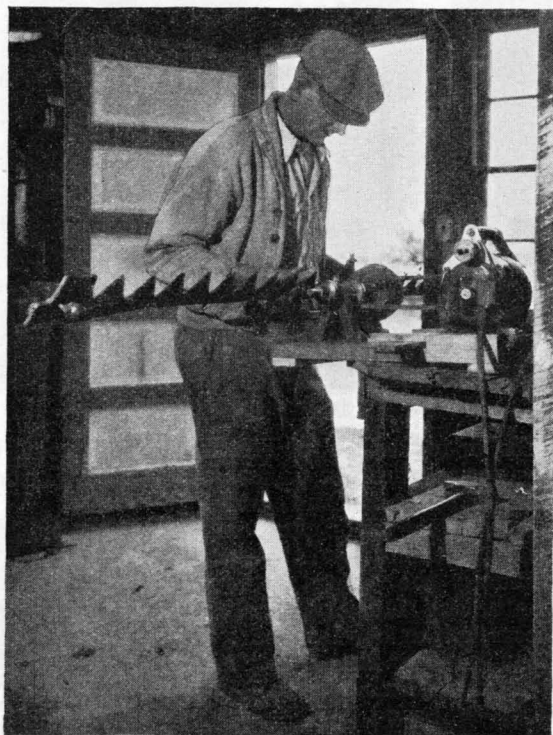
Sharpening mower knives with portable-motor grinding rig
